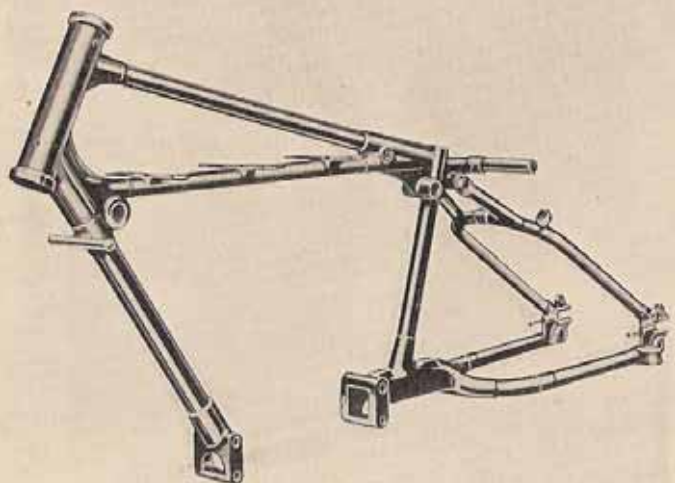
THE NEW A.J.S. FRAME OF WELDLESS
